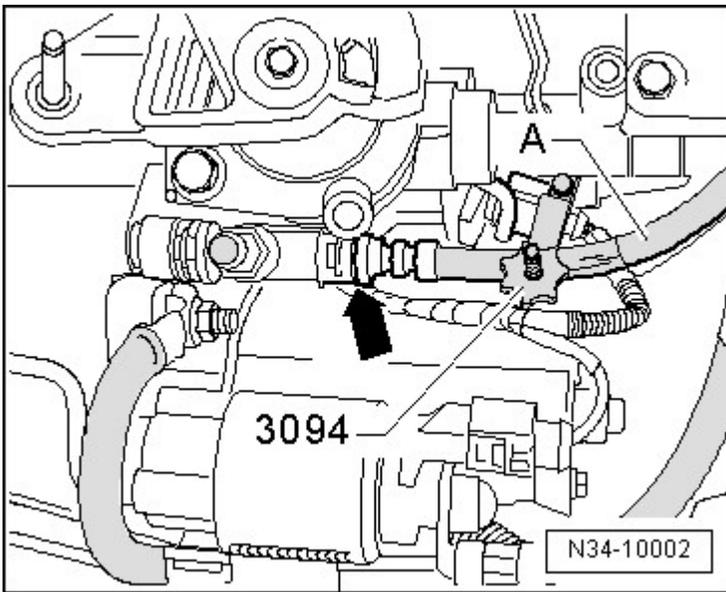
Clamping Off Hose/Line Assembly Hose To Slave Cylinder With Hose Clamps
